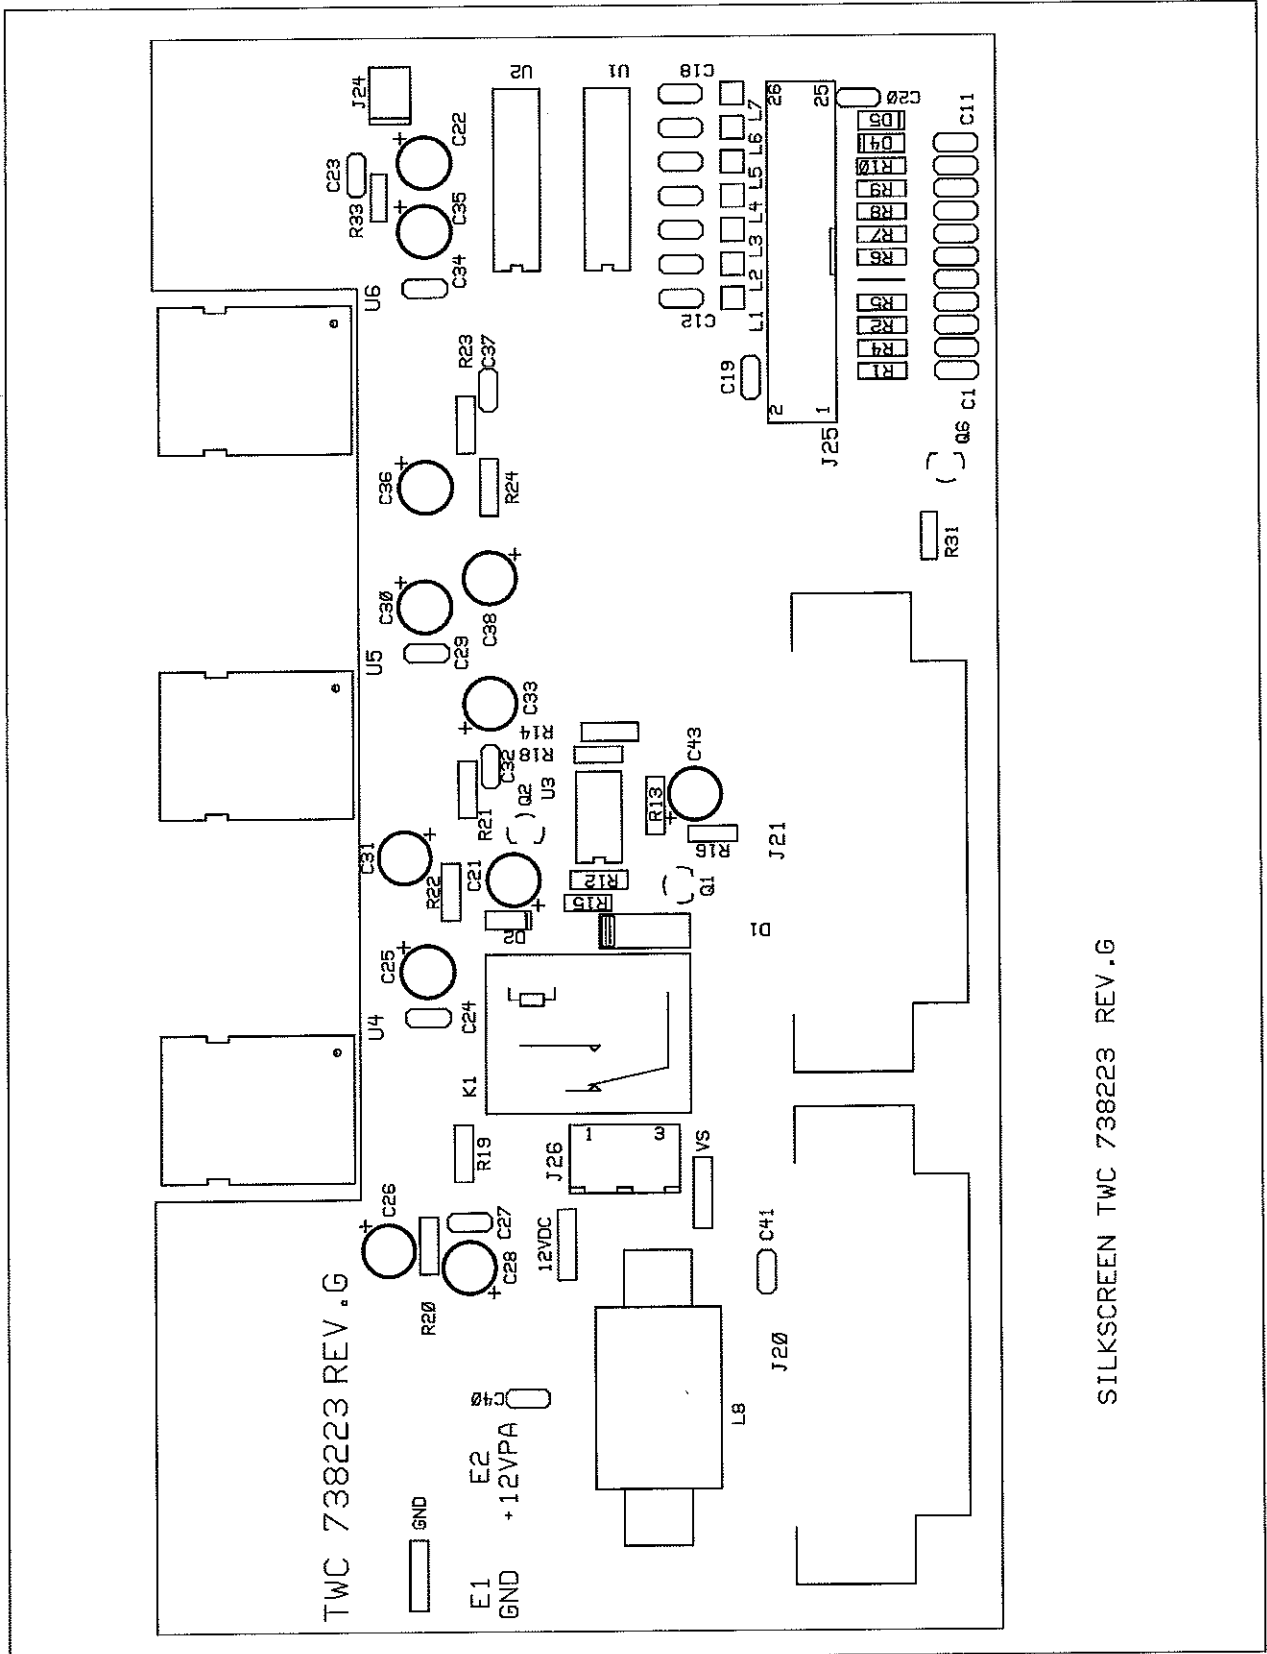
Power Supply Board Component Locations (738223 Rev. G)
